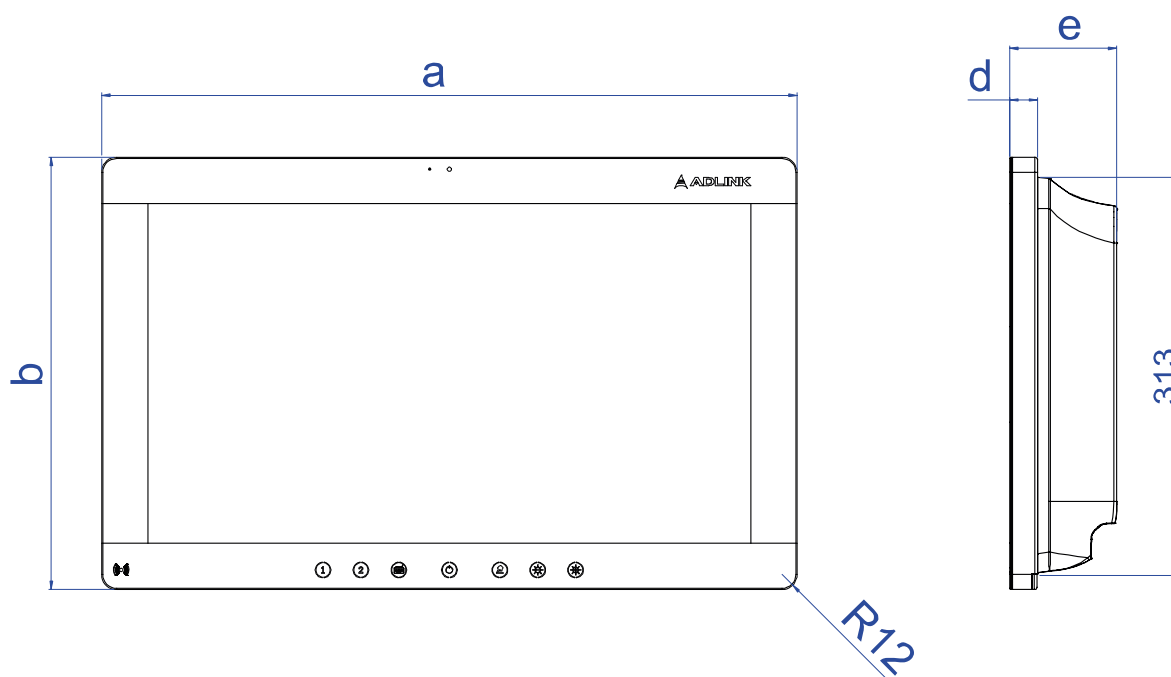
MLC-S12-xx front and side dimensions in [mm]
